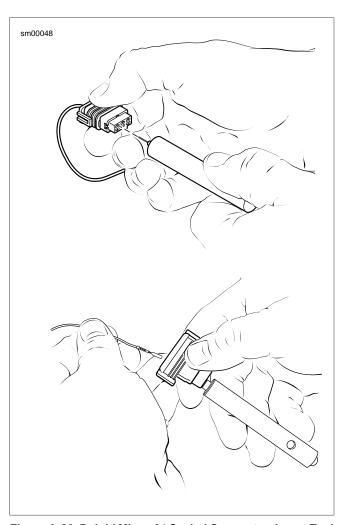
Delphi Micro-64 Sealed Connector: Insert Tool and Remove Terminal
